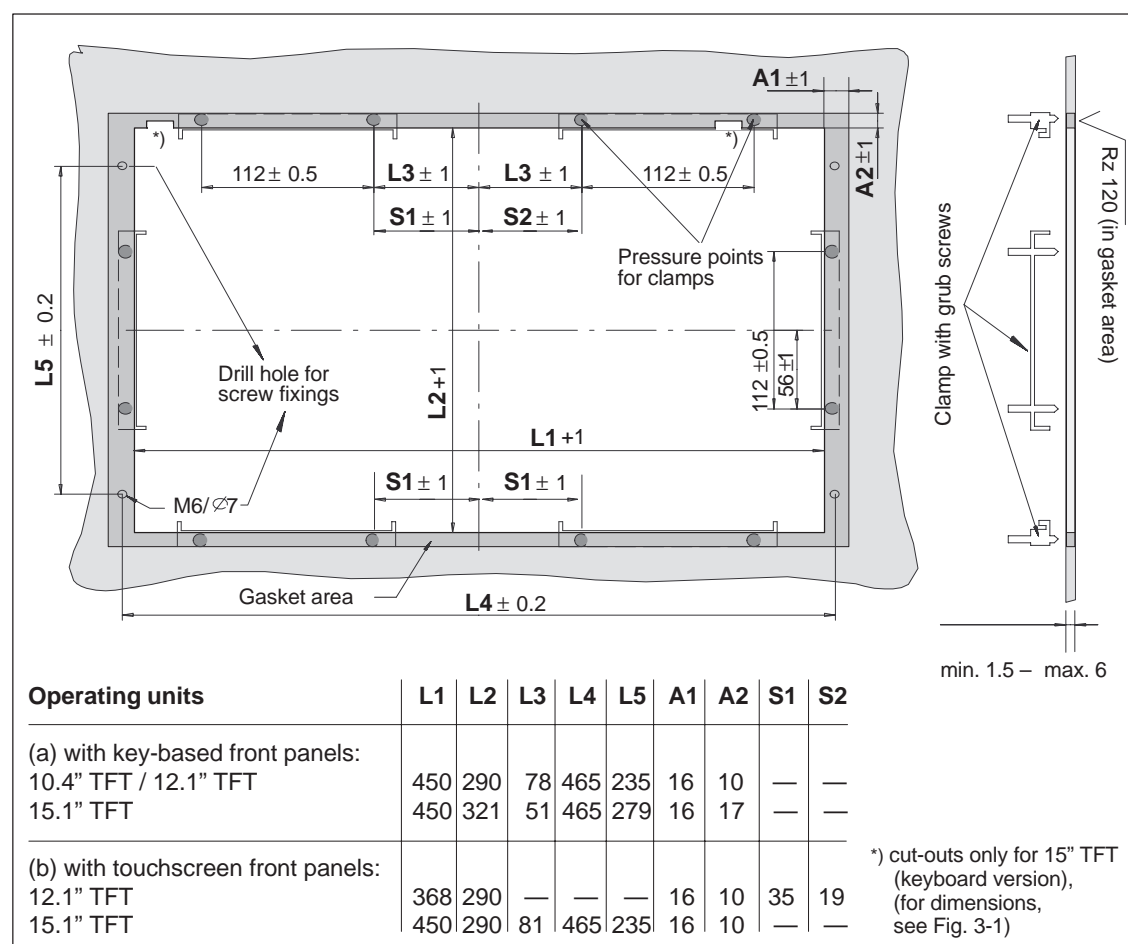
Dimensions for installation of the operating unit of Panel PC 670
